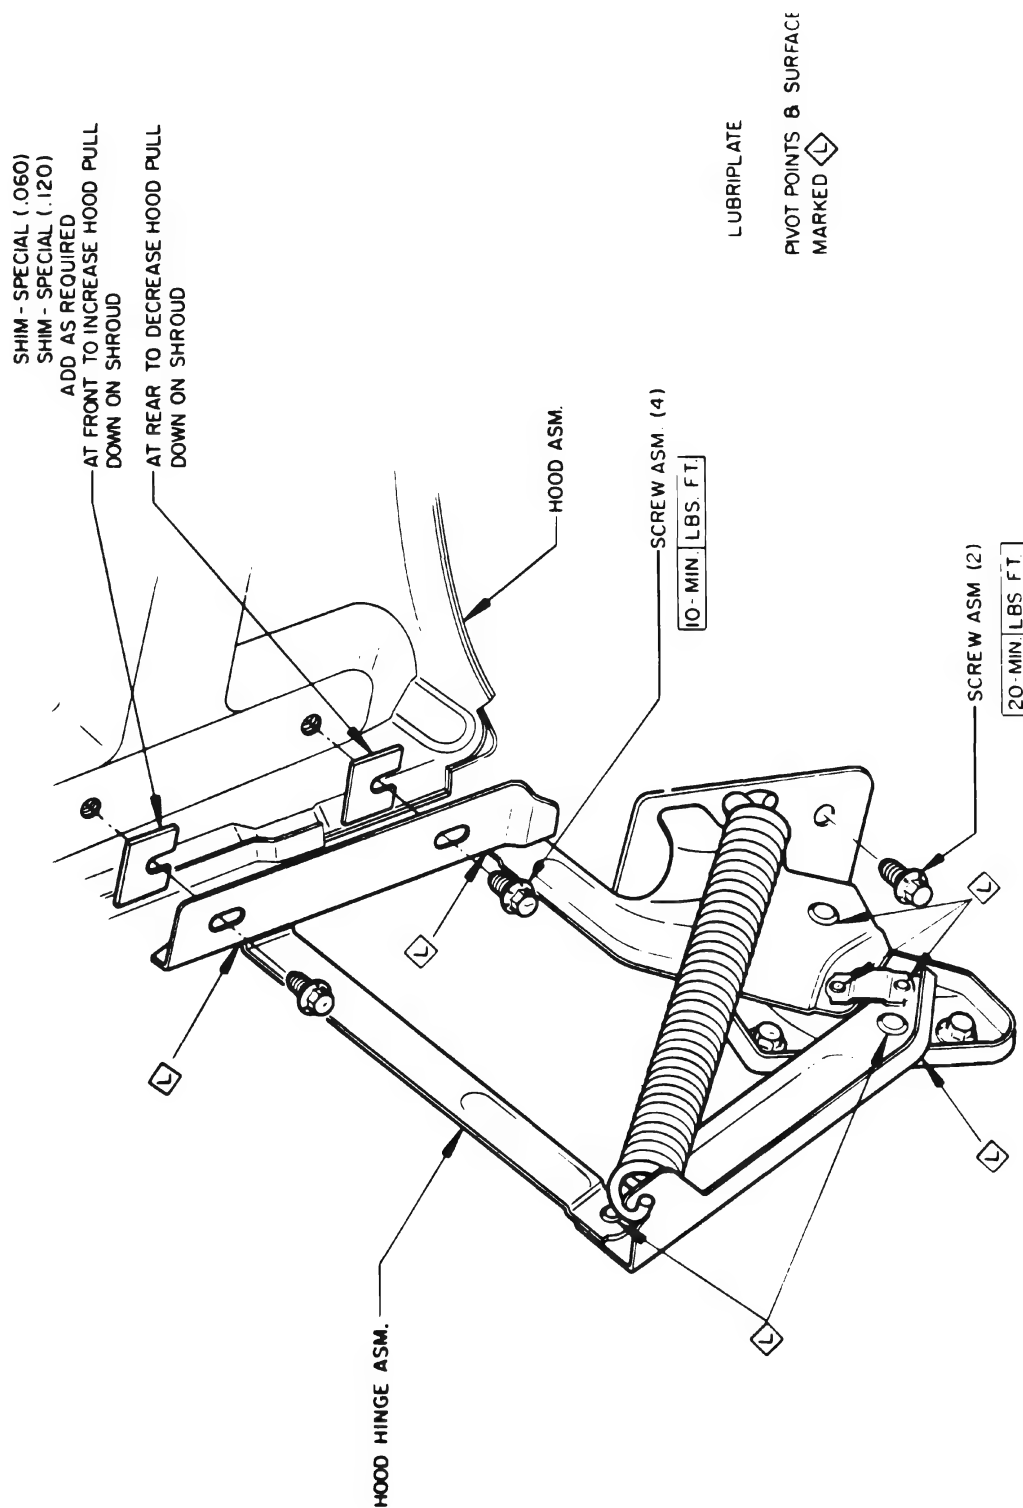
Hood Hinge Assembly—44-46-4800 Series
